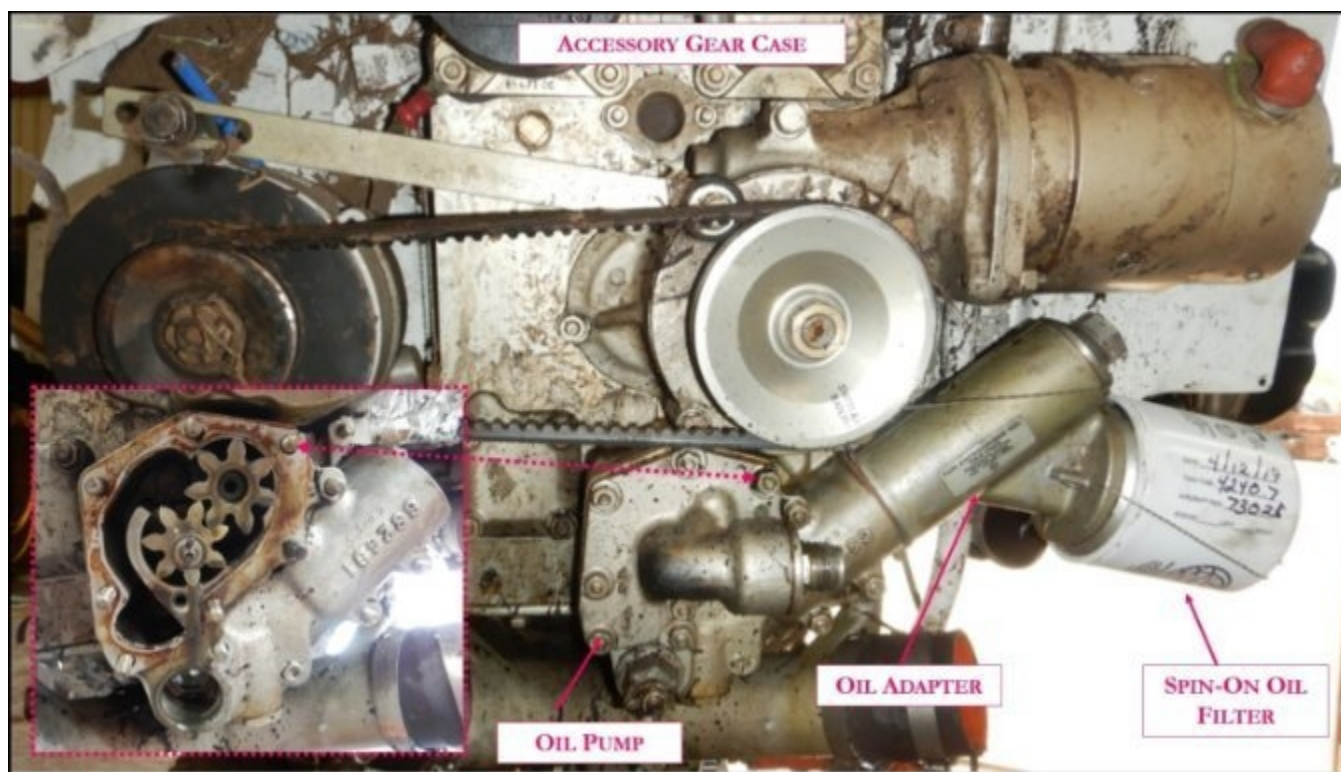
Accessory Gear Case Showing Location of Oil Filter Adapter
